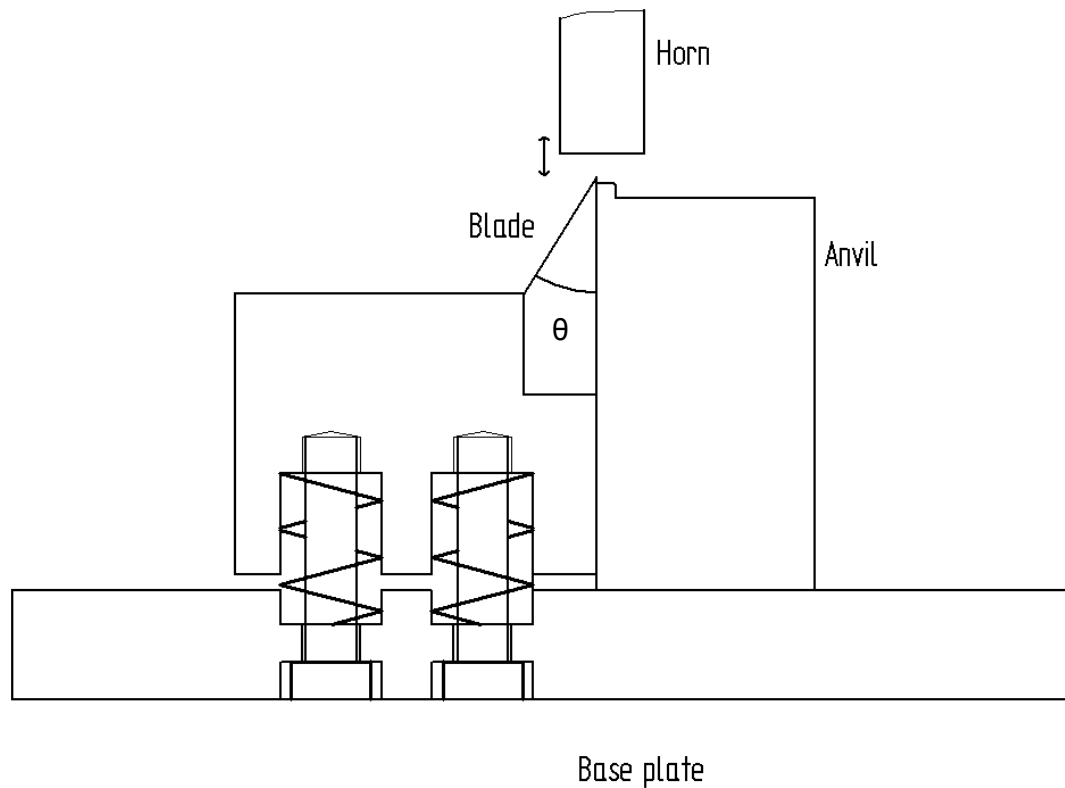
Ultrasonic seal-cut tool,  $\theta$  - cutting angle
